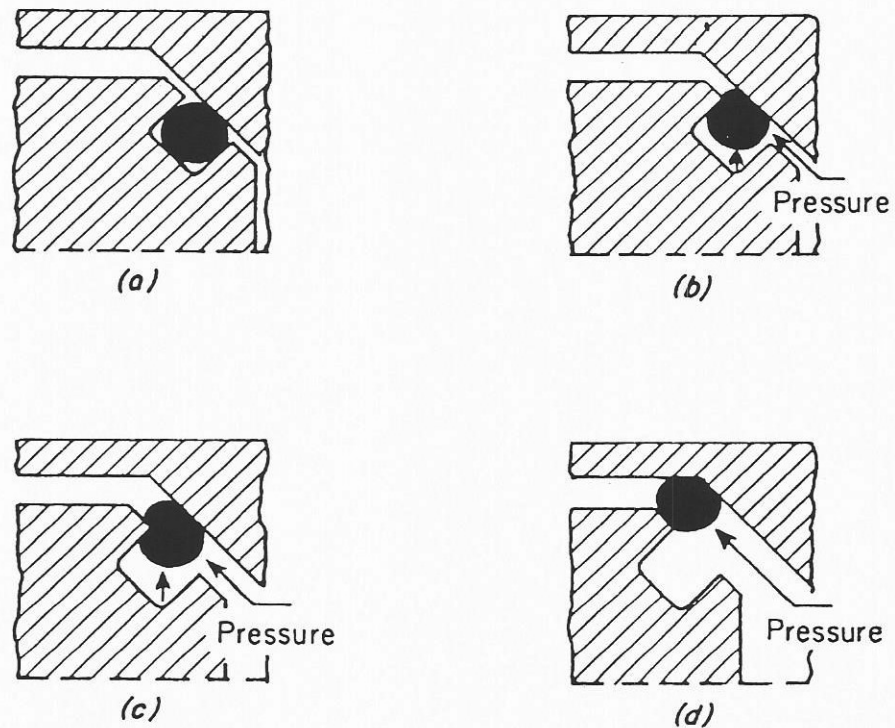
Blowout of O-ring used as a valve seat. As the valve opens, the space between the two faces becomes larger. The pressure acts on the O-ring. The ring continues to seal the opening until it is completely stretched out of the groove.
